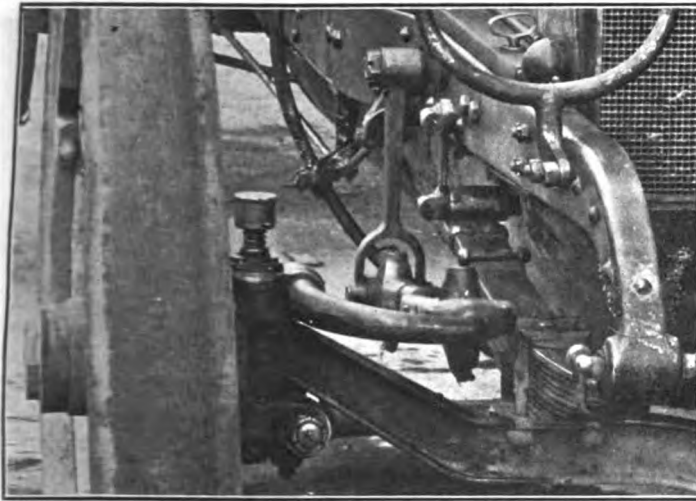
Detail of front axle presenting an I-section with flat perches for semi-elliptic springs, substantial knuckle with a through pin and means for lubrication
